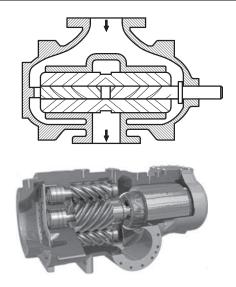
Three-screw rotary pump. Courtesy of IMO Industries: Pump Division.
